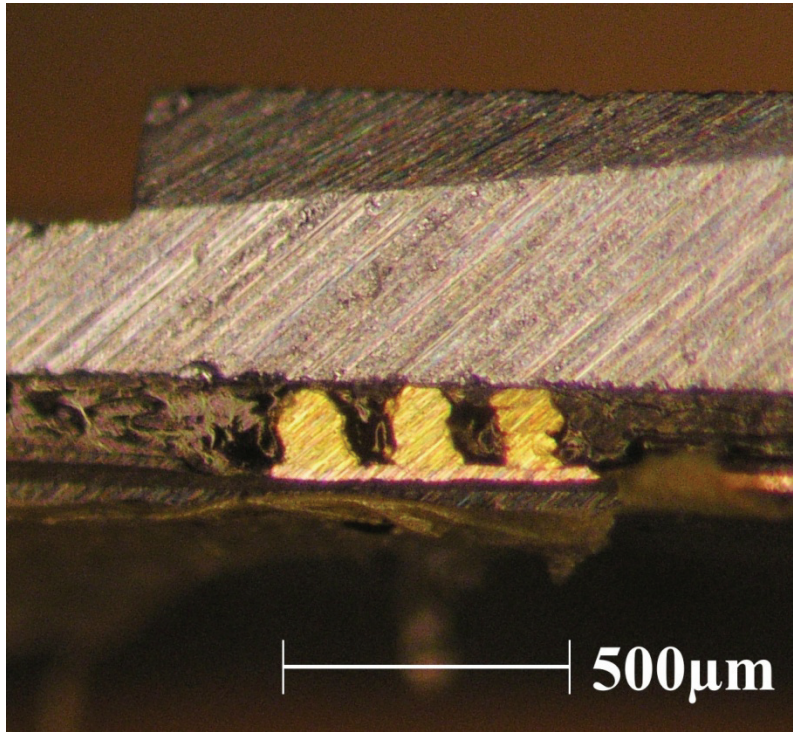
A cross-sectional view of a flip-chip bond between a sensor chip and FPCB created using stacked coined stud bumps and an underfill adhesive.
